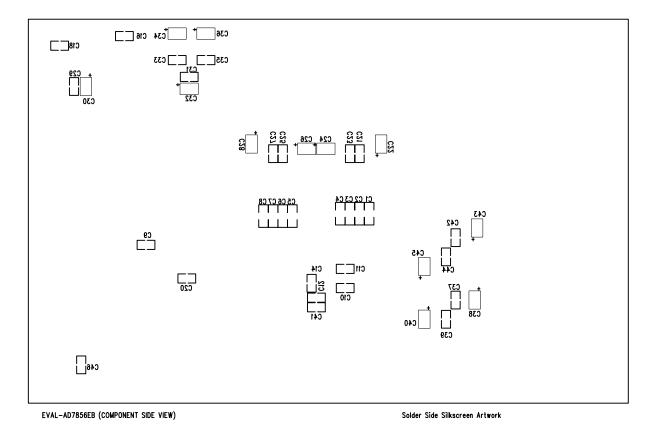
AD7856 Evaluation Board Component Placement Drawing (Solder Side).
